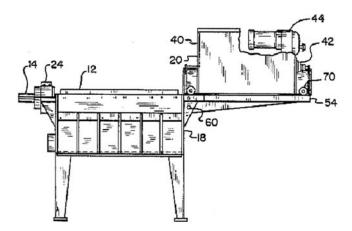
Schematic drawing of a rotary knife cutter with a roll-off cover (1988, US4738404 A, SPROUT-BAUER, INC). 12, Cylindrical rotor; 14, Rotor shaft; 18, Base portion of the cutter housing; 20, Cover portion of the cutter housing; 24, Bearing bushing; 40, Feeder; 42, Feed rolls; 44, Variable speed motor; 54, Laterally spaced rails; 60, Hinge pin means; and 70, Laterally extending side flanges.
